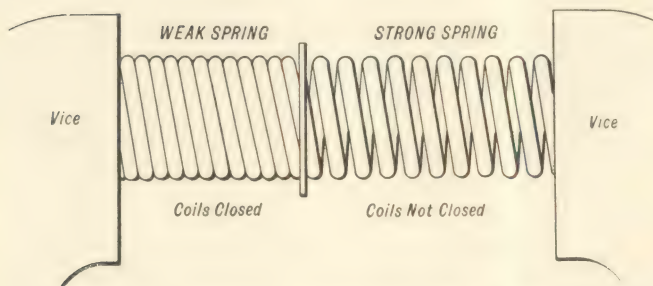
METHOD OF TESTING VALVE SPRINGS
